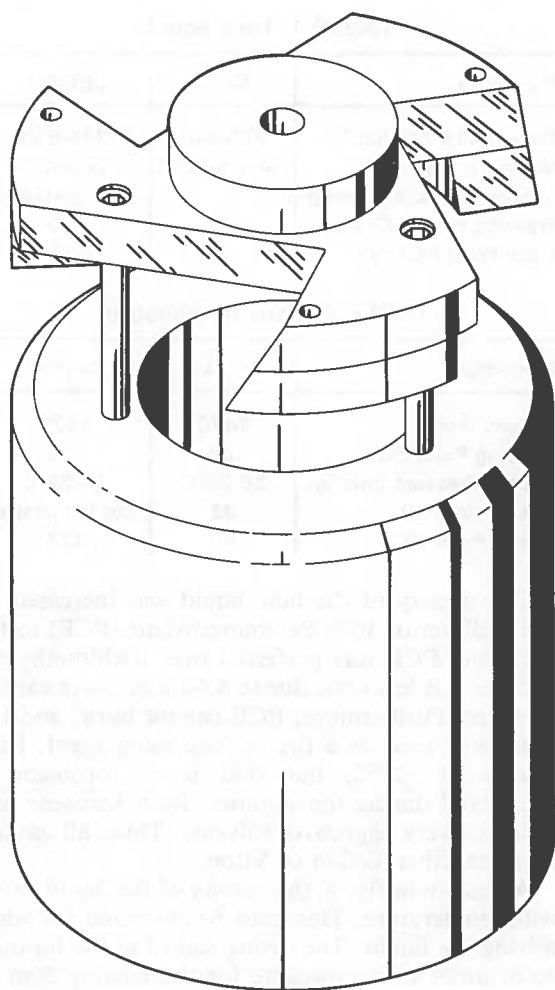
Reamer. The reamer is mounted on the exit shaft of the electronic section. The front cylinder centers the unit in the hole.
